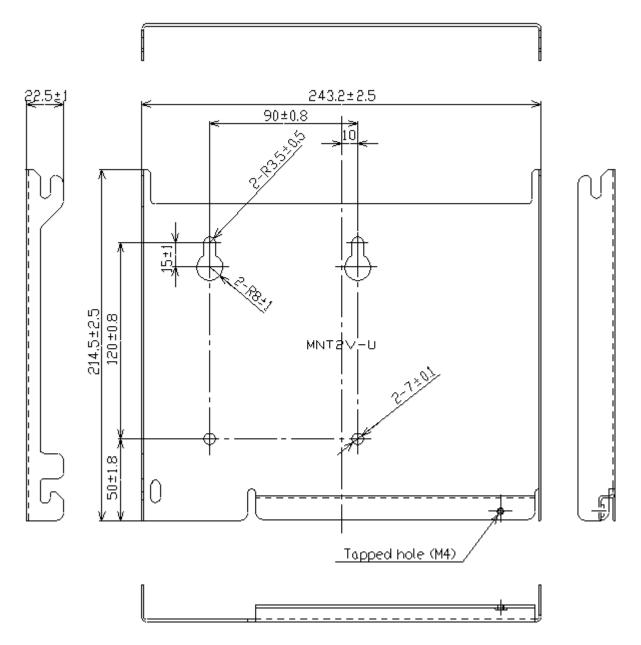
200mW RP Mounting Plate (RP Mounting Base)
